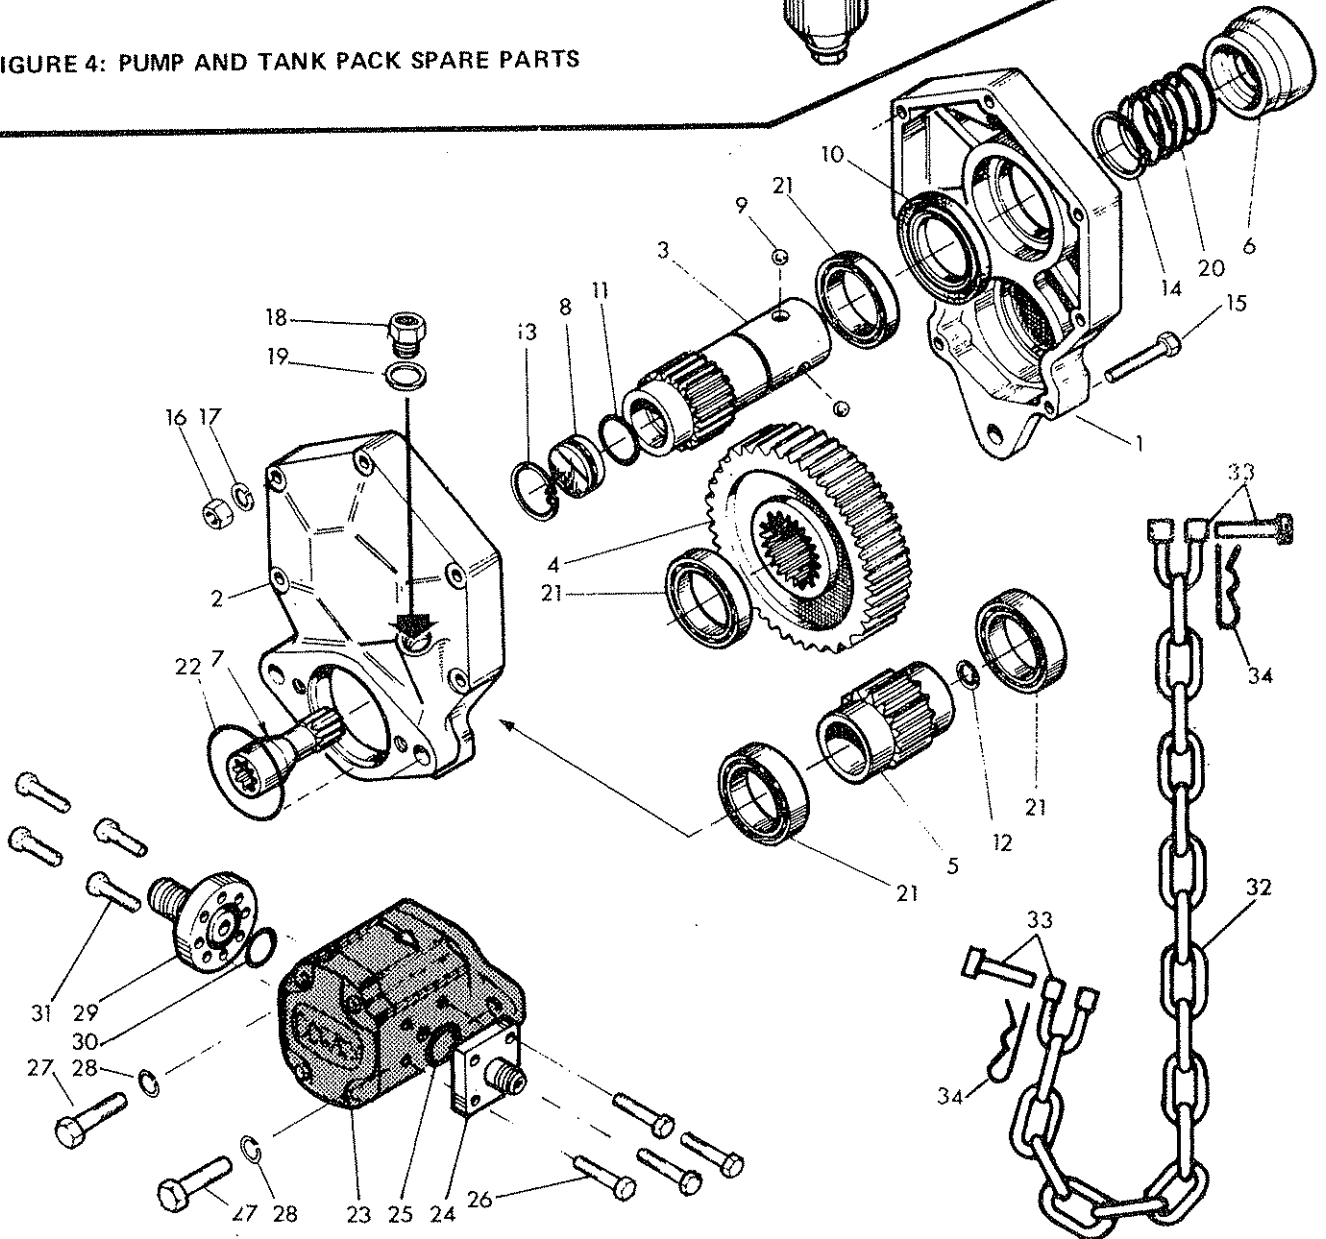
GEARBOX/PUMP SPARE PARTS
